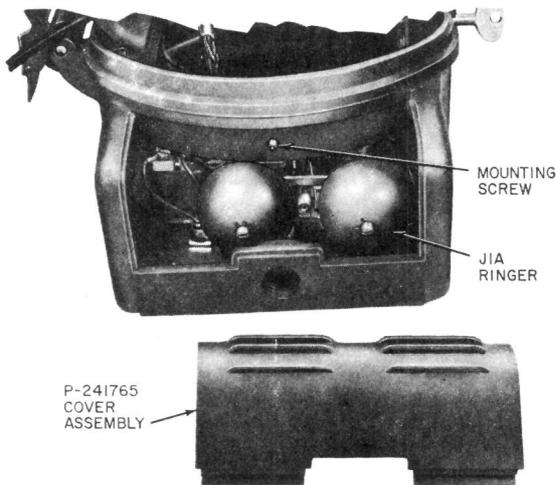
525 (MD)-Type Telephone Set, Cover Assembly Removed
